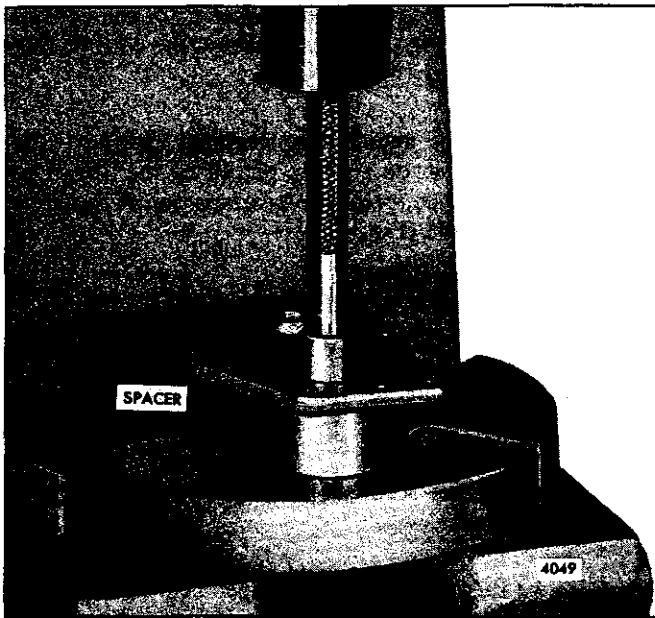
Removing Governor Cover Bearing Using Tool J 21967-01
